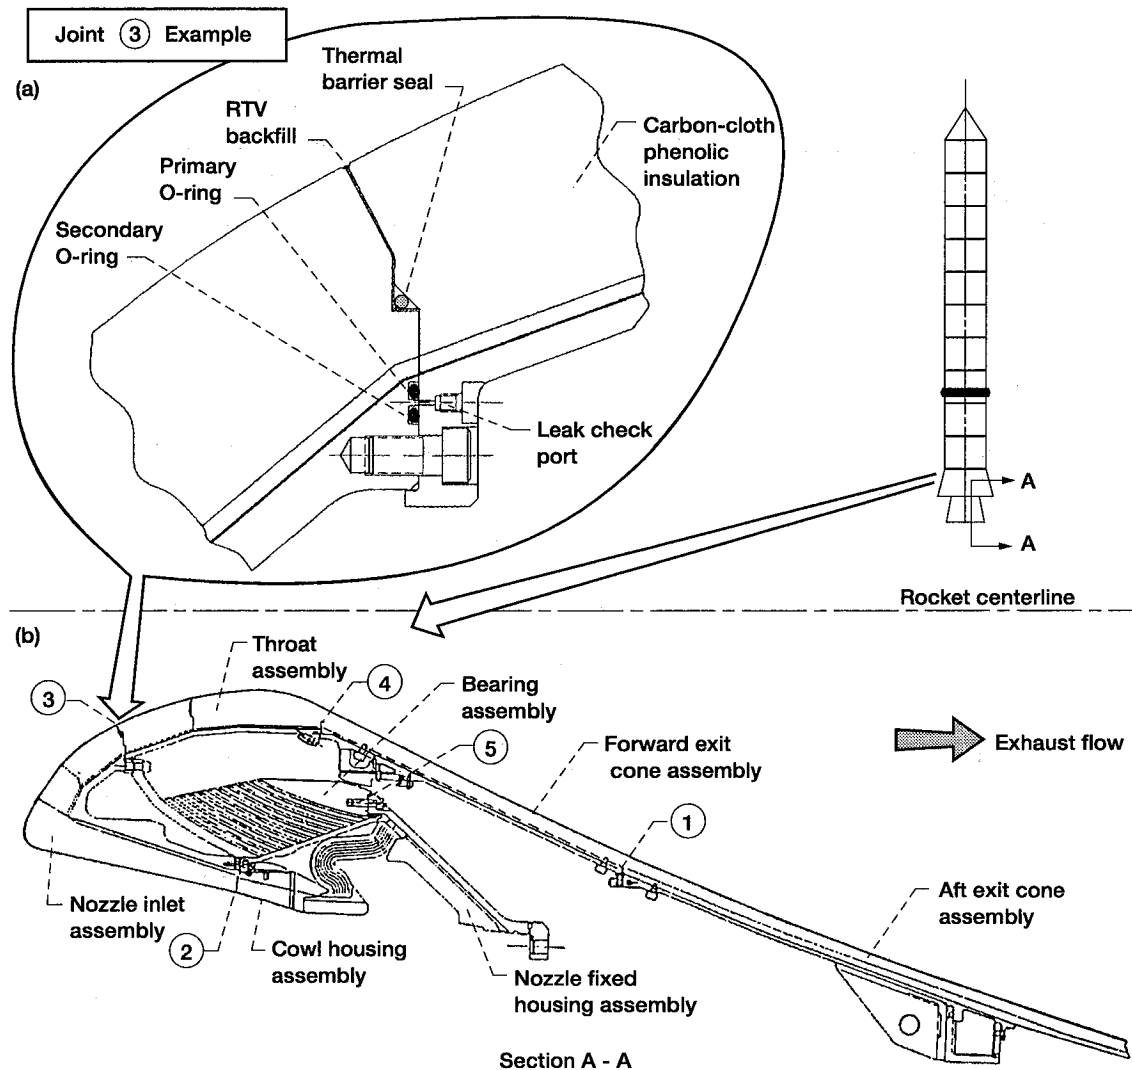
Potential Shuttle solid rocket motor joint locations for candidate thermal barrier seal. (a) Enlarged view of Joint 3 showing primary and secondary pressure O-rings, leak-check port, and proposed thermal barrier seal location. (b) Overall nozzle cross-section (half view).
